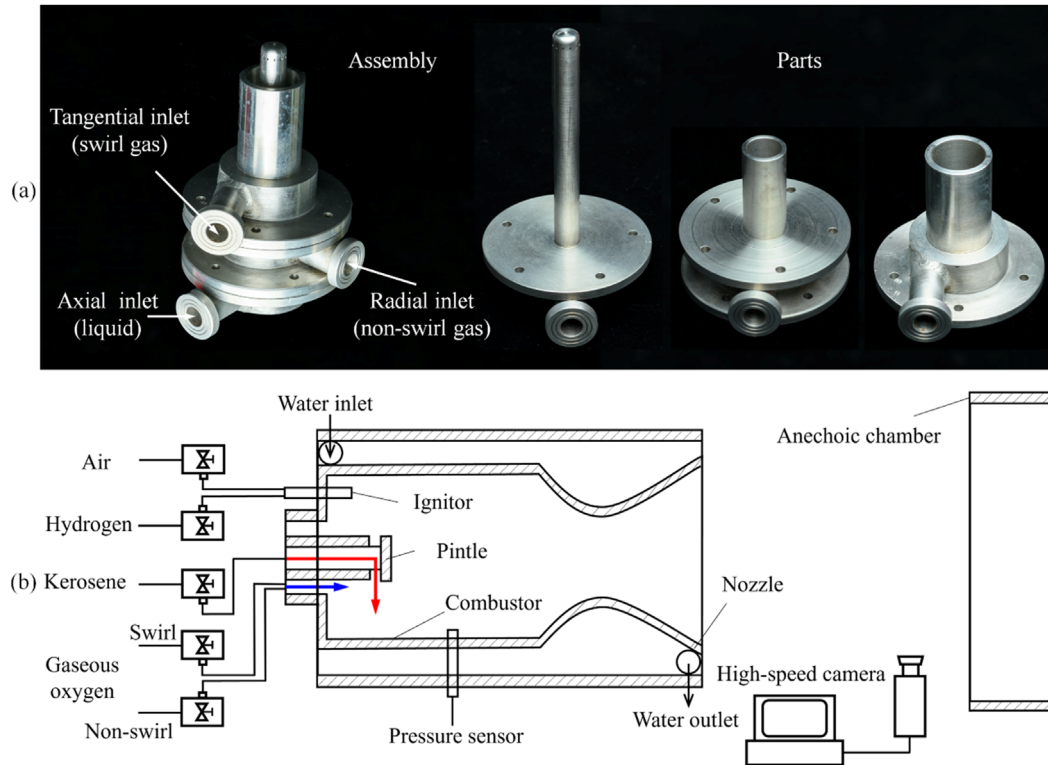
(a) Assembly and parts of the swirl-assisted gas–liquid pintle injector for the cold flow test and (b) schematic of experimental apparatus for the combustion tests.
